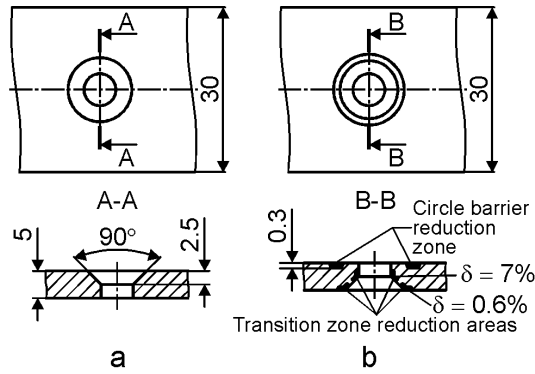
Strip with Cylindrical Hole Test-Piece:
